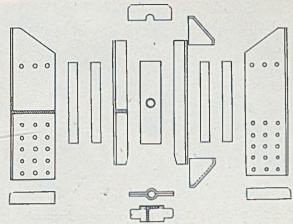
Seventeen Component Parts for a Centre Filler to be Fabricated by Welding.
